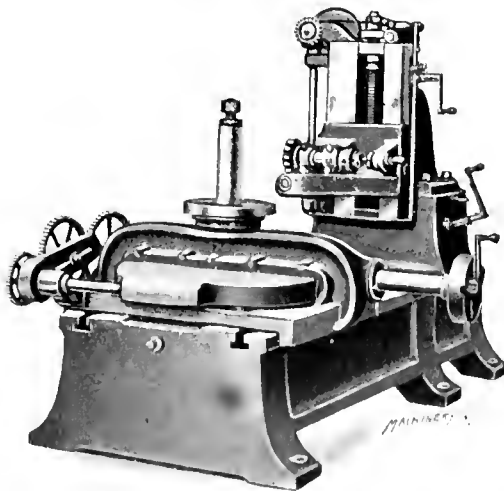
Heavy Armstrong Whitworth Gear-cutting Machine.
